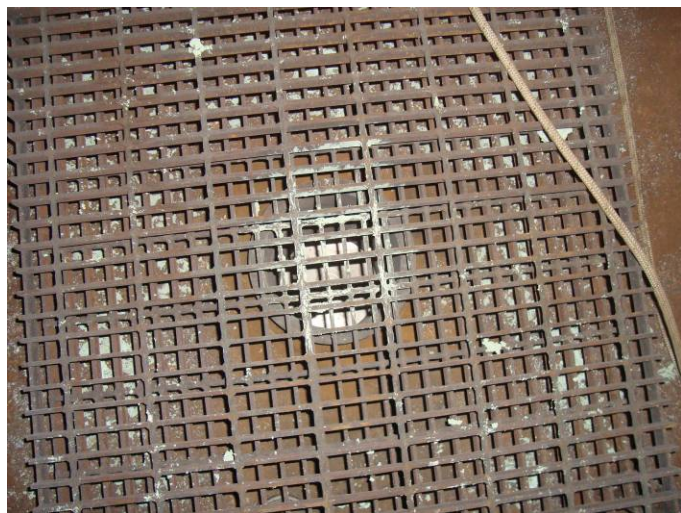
Looking down at nozzle N2-8” outlet and vortex breaker
